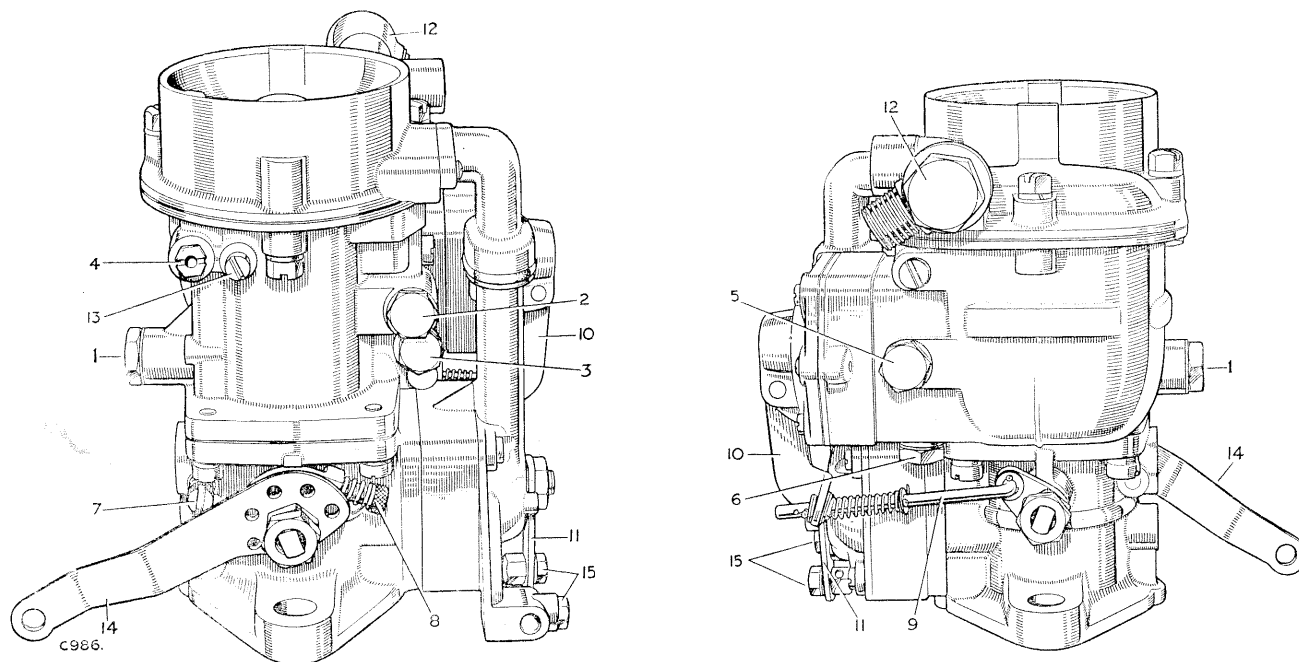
Carburettor jets and controls, 2½ litre Petrol
